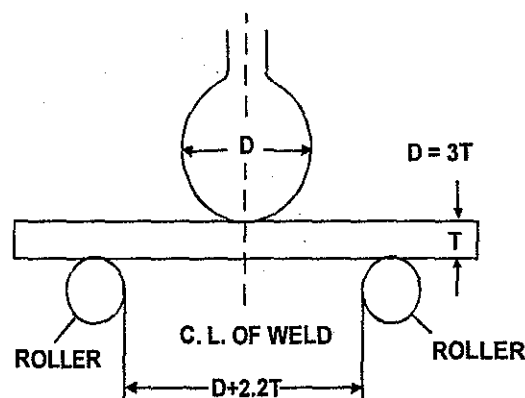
TRANSVERSE BEND TEST ON BUTT-WELD SPECIMENS
